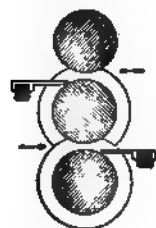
Housing for 28-inch Three-high Mill. (Harbord and Hall.)
